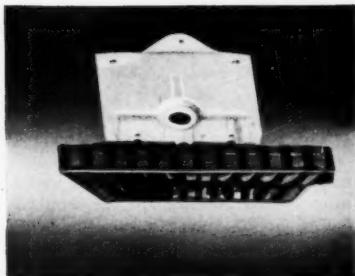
Metal inserts and rubber-phenolic block can be accurately machined to desired shape after molding
